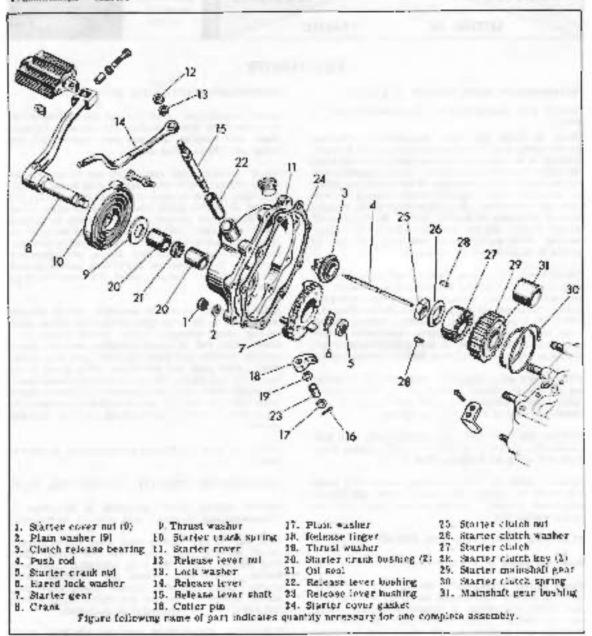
C-1. Kink Starter Assembly - Exploded Vice
